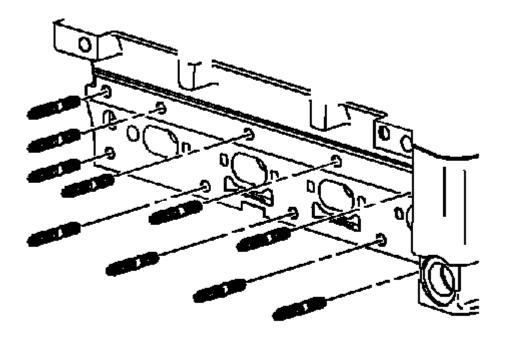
Exhaust Manifold Studs Courtesy of GENERAL MOTORS COMPANY
